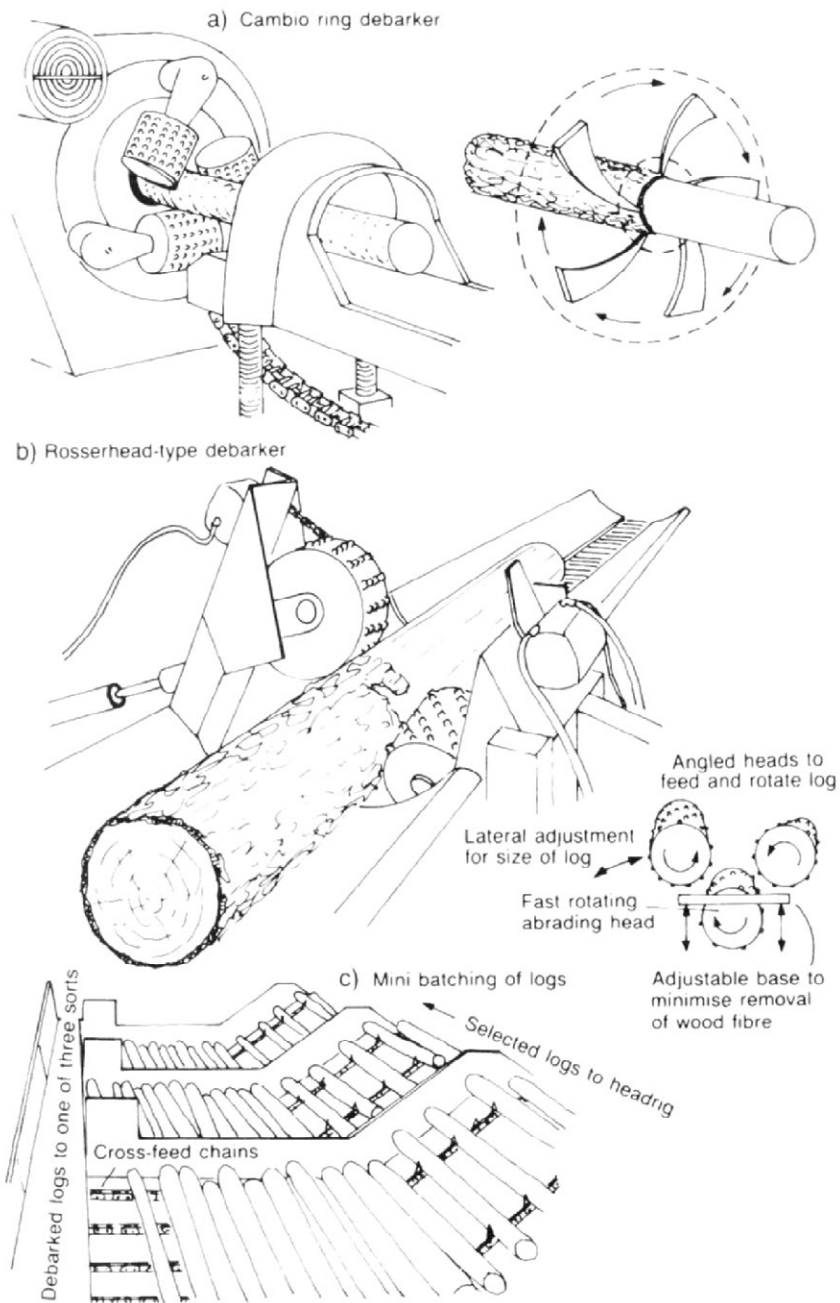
Log preparation before entering the mill. (a) Cambio ring debarker. (b) Rosserhead type debarker. (c). Mini-batching immediately prior to milling.
